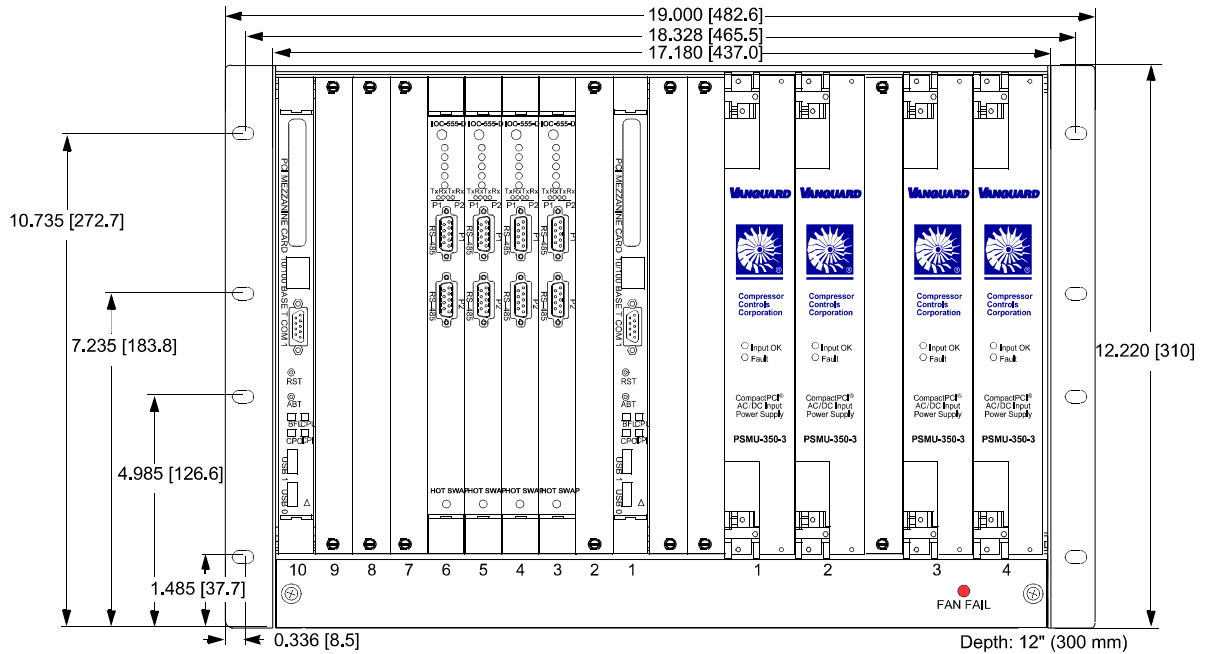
Rack Mount Duplex CPCI-10-D2-NPS Chassis Dimensions
